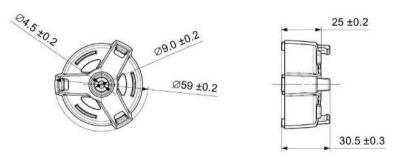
Dimension drawing of spacer 6GT2690-0AL00
